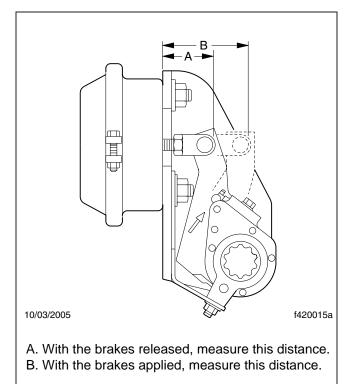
Brake Stroke Check, Haldex Automatic Slack Adjuster
